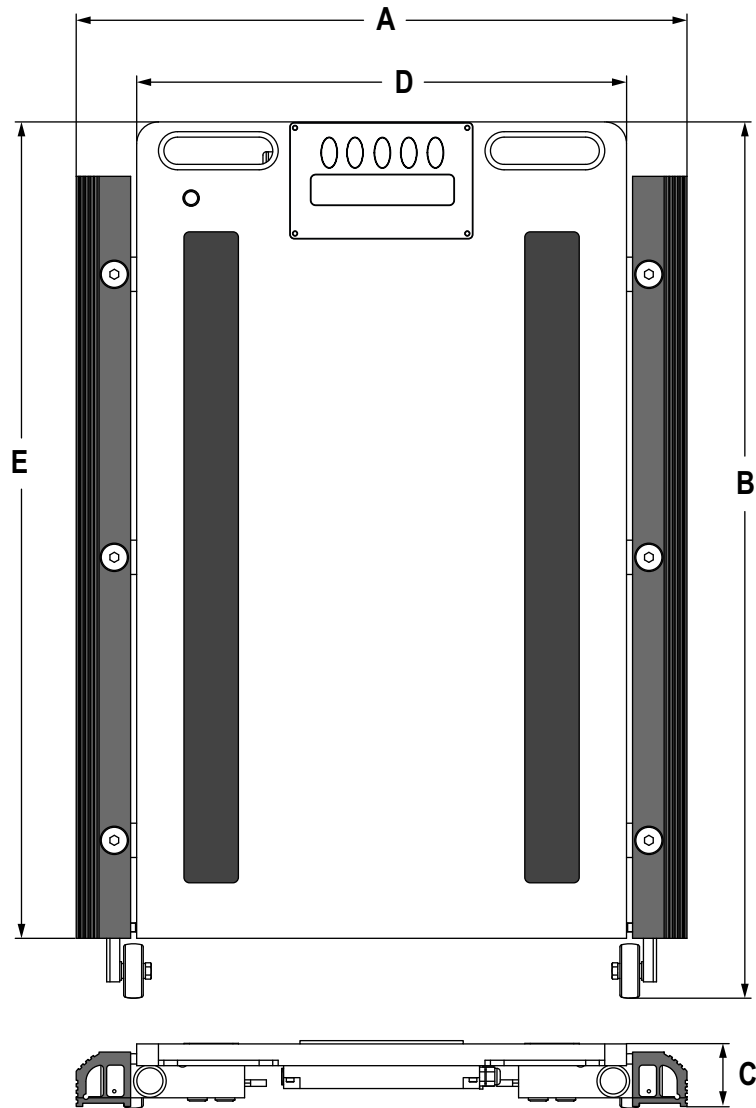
Wheel Weigh Pad Dimensions Diagram
